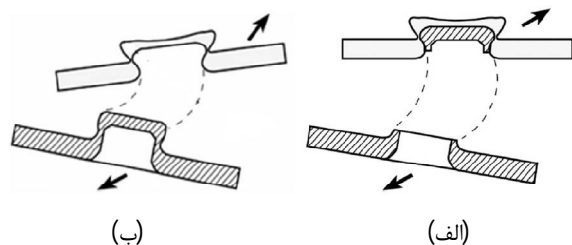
Fracture mechanisms in the joints produced by clinching a) fracture from neck thickness and b) separation from the bottom [15]
